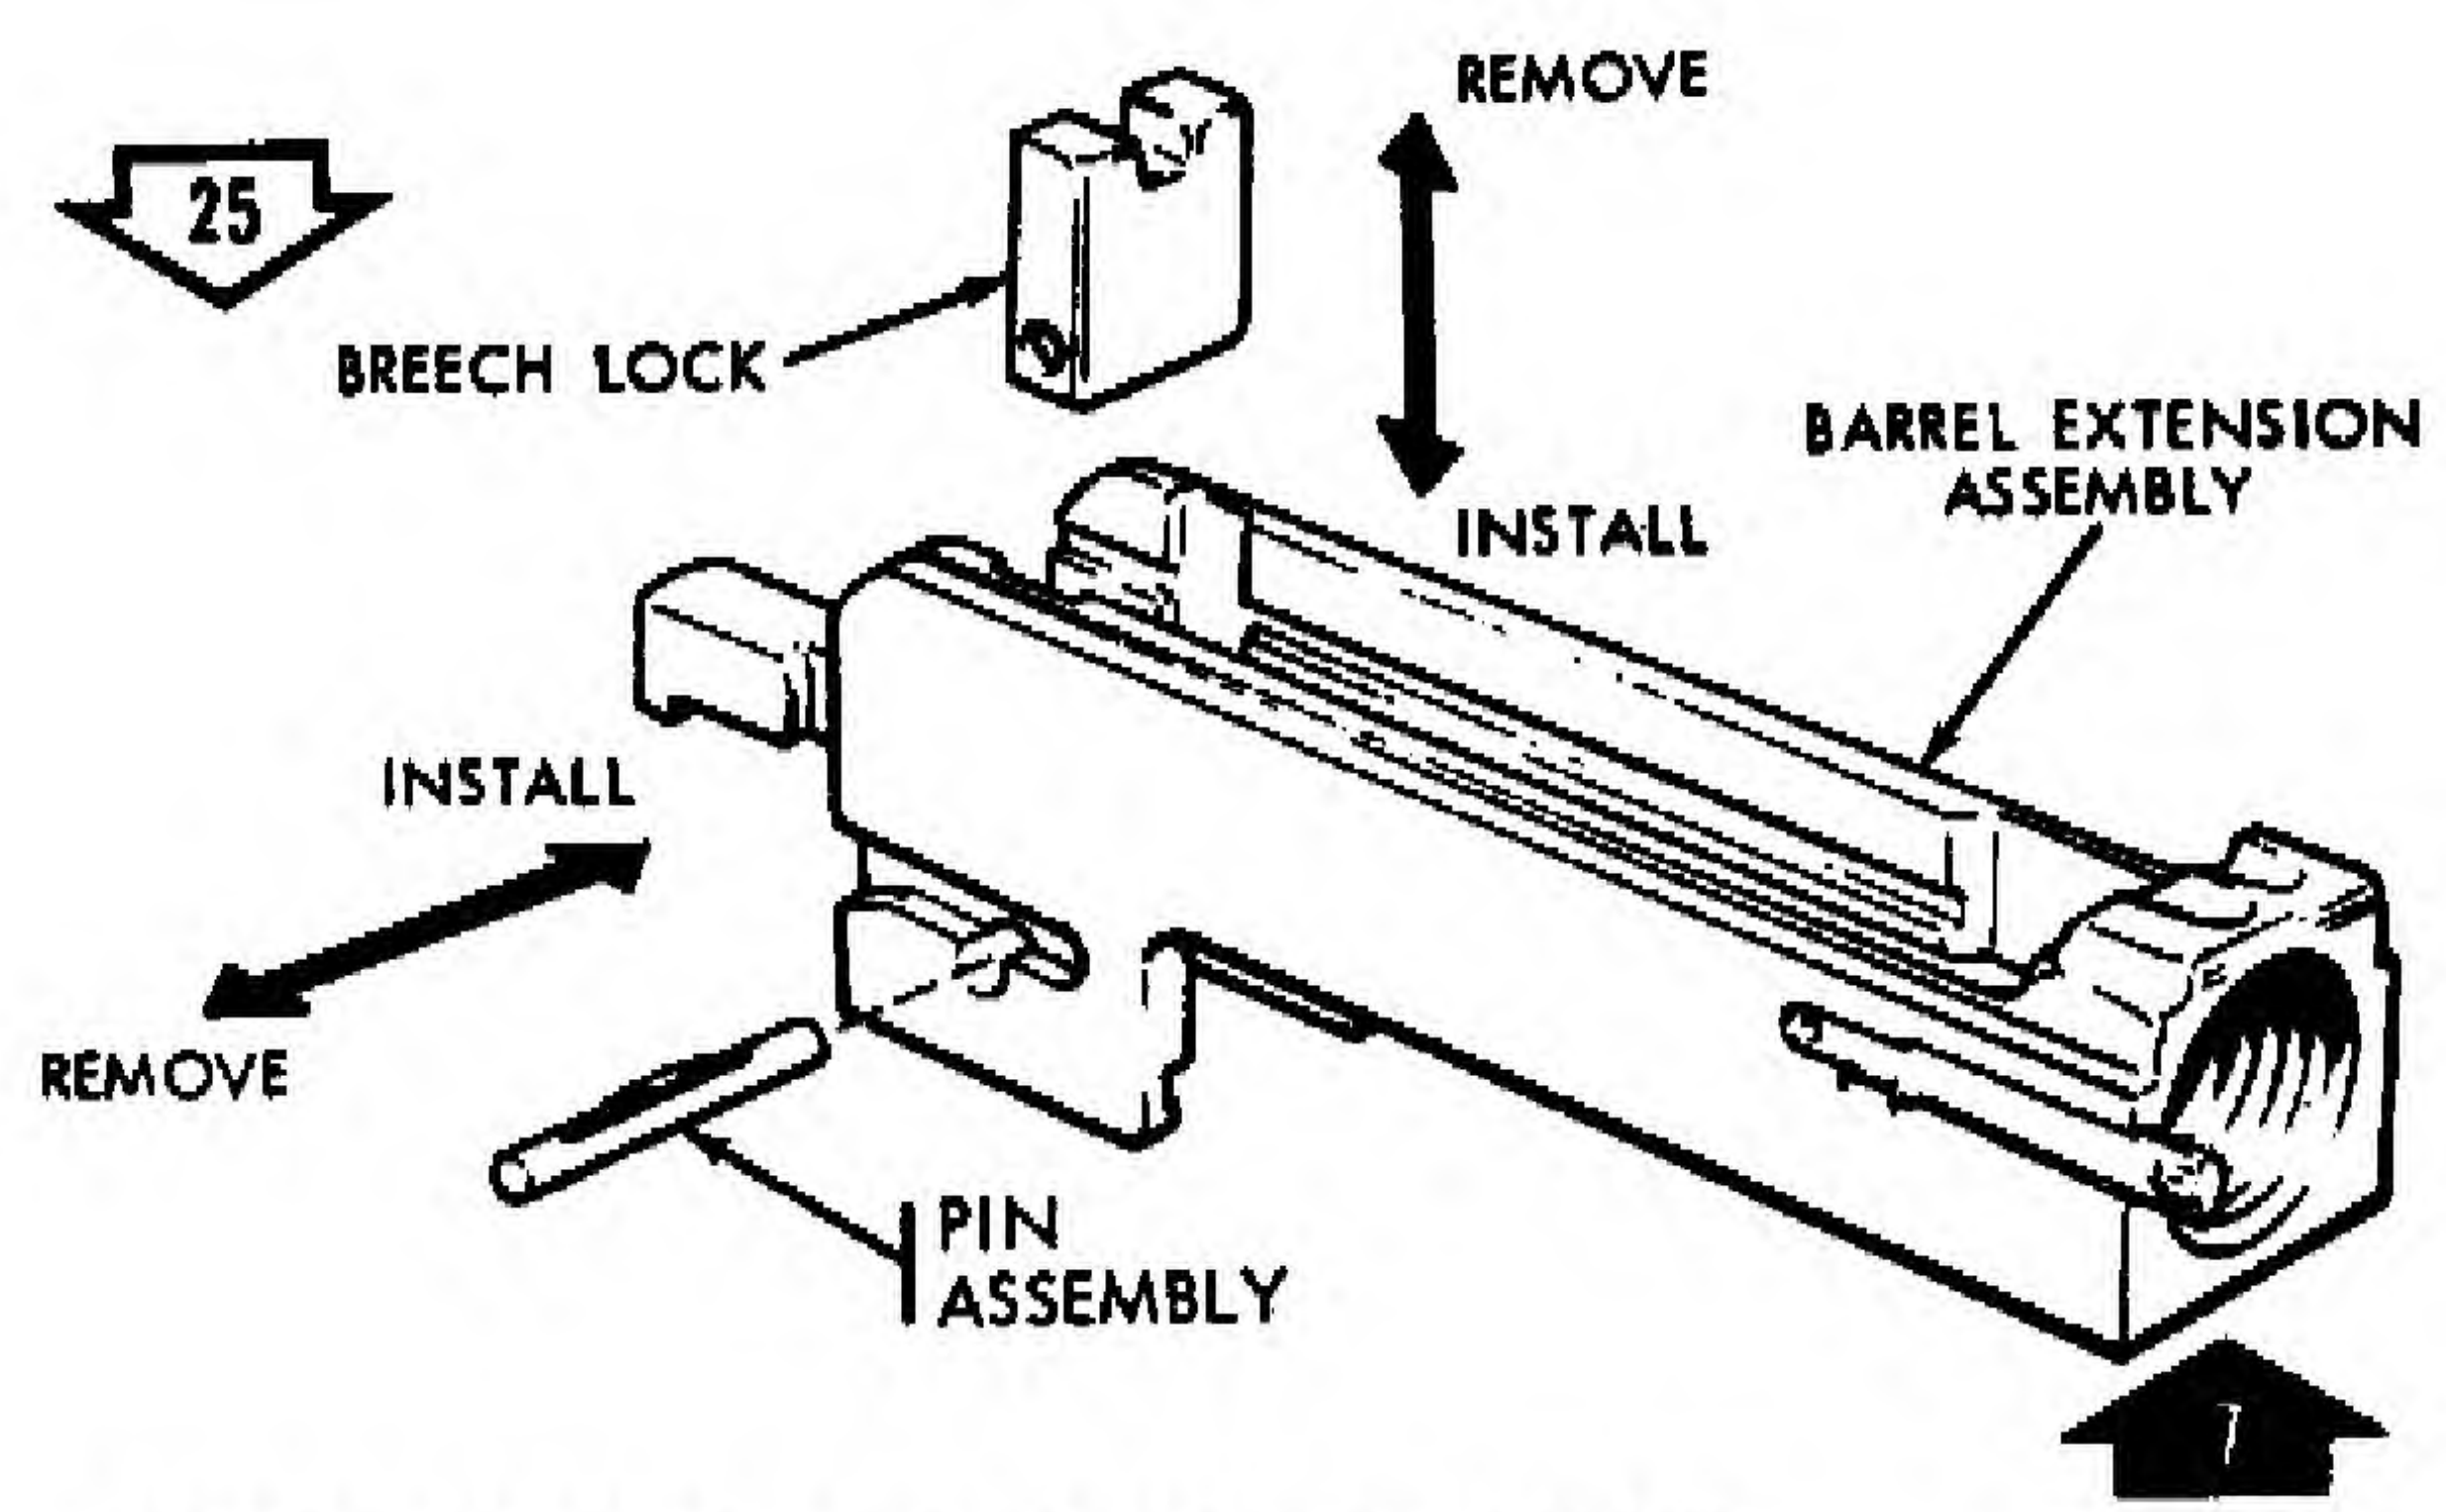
Disassembly/assembly of Caliber .50 Machine Gun, M2. (15 of 20)
